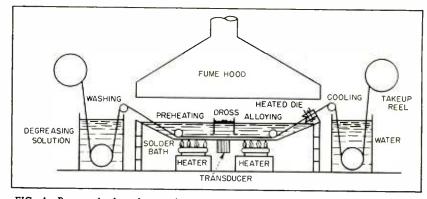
Proposed plant layout for continuous tinning of aluminum wire, using ultrasonic transducer under molten solder bath
